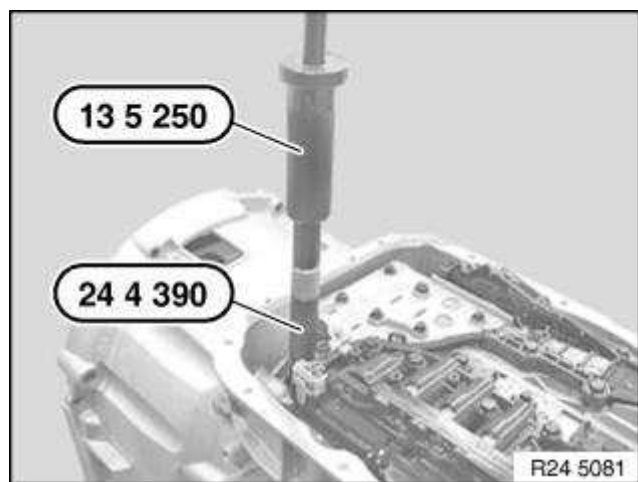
Pull Transmission Oil Filter Gasket Out Of Housing With Special Tools 24 4 390 And 13 5 250
